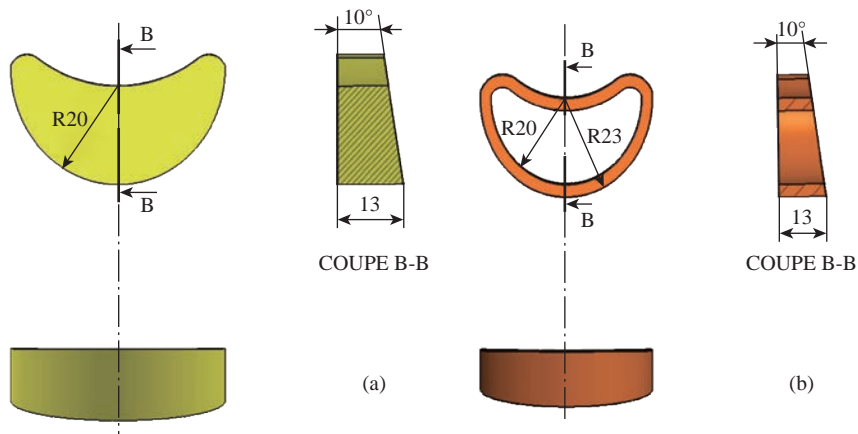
Definition drawing of the lumbar intersomatic fusion cage [42-44, 46]. (a) Graft bone; (b) Intersomatic cage made of PEEK.
